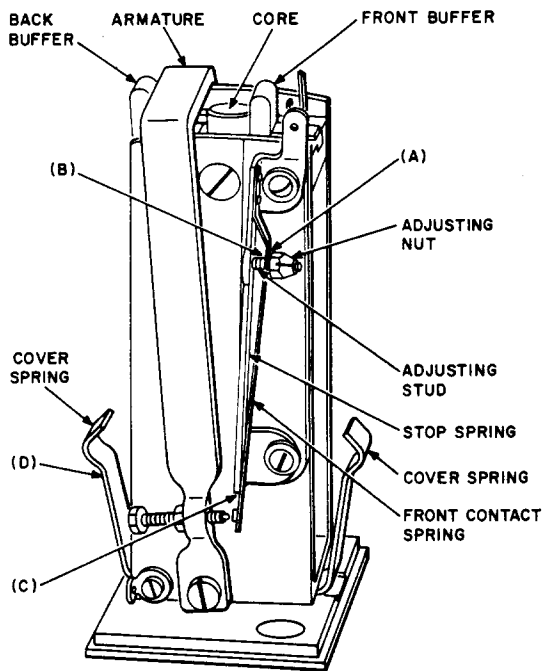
85F-Type Relay — Arrangement of Operating Parts
